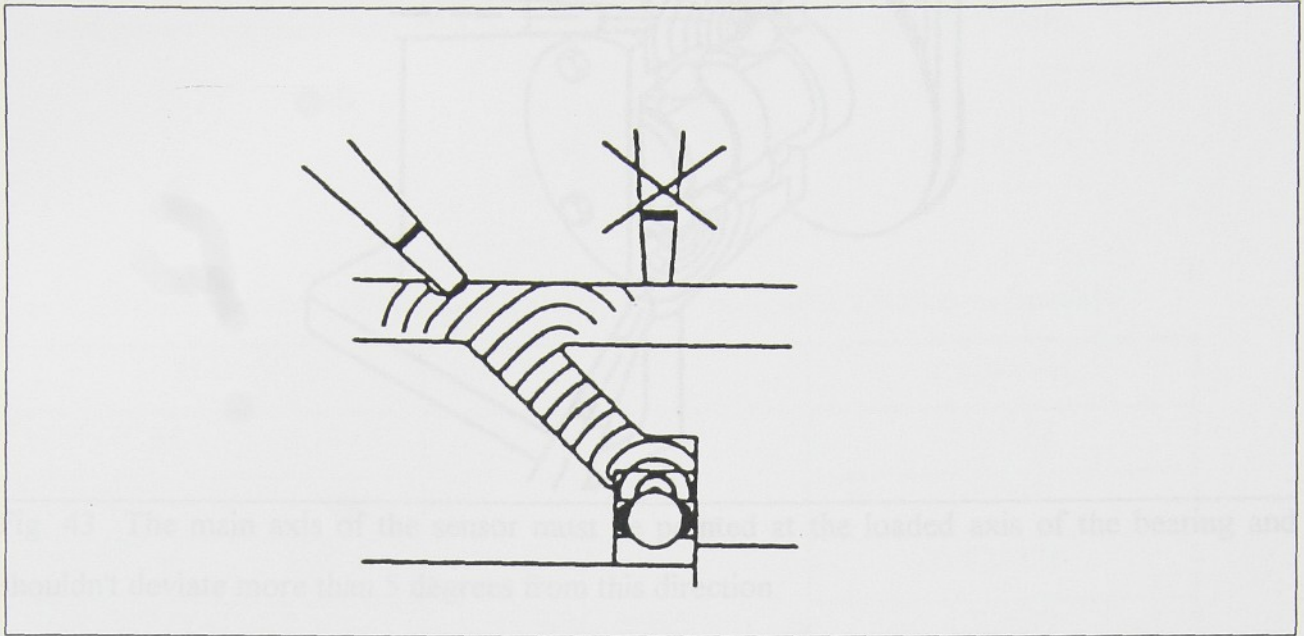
The direction of the signal path between the bearing and the measurement place must be straight and through. The distance between the point of measurement and the bearing shouldn't be bigger than 75 mm.
